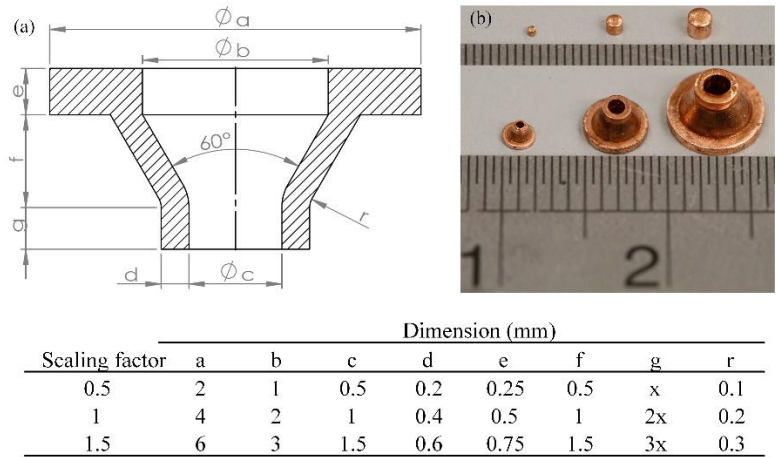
(a) Designed dimensions of the flanged parts with three scaling factors and (b) formed parts.
